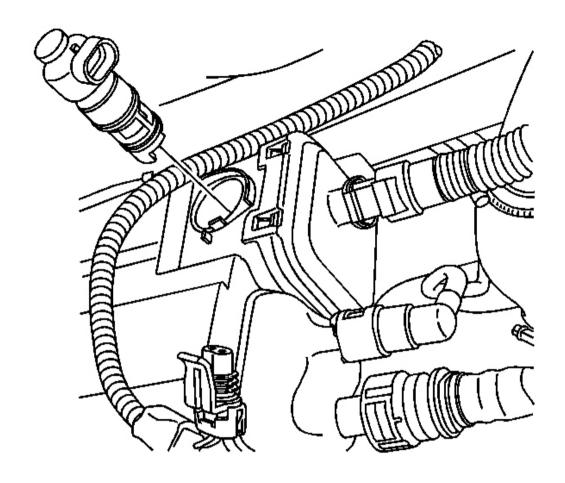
View Of Vent Valve From The EVAP Canister Courtesy of GENERAL MOTORS CORP.
